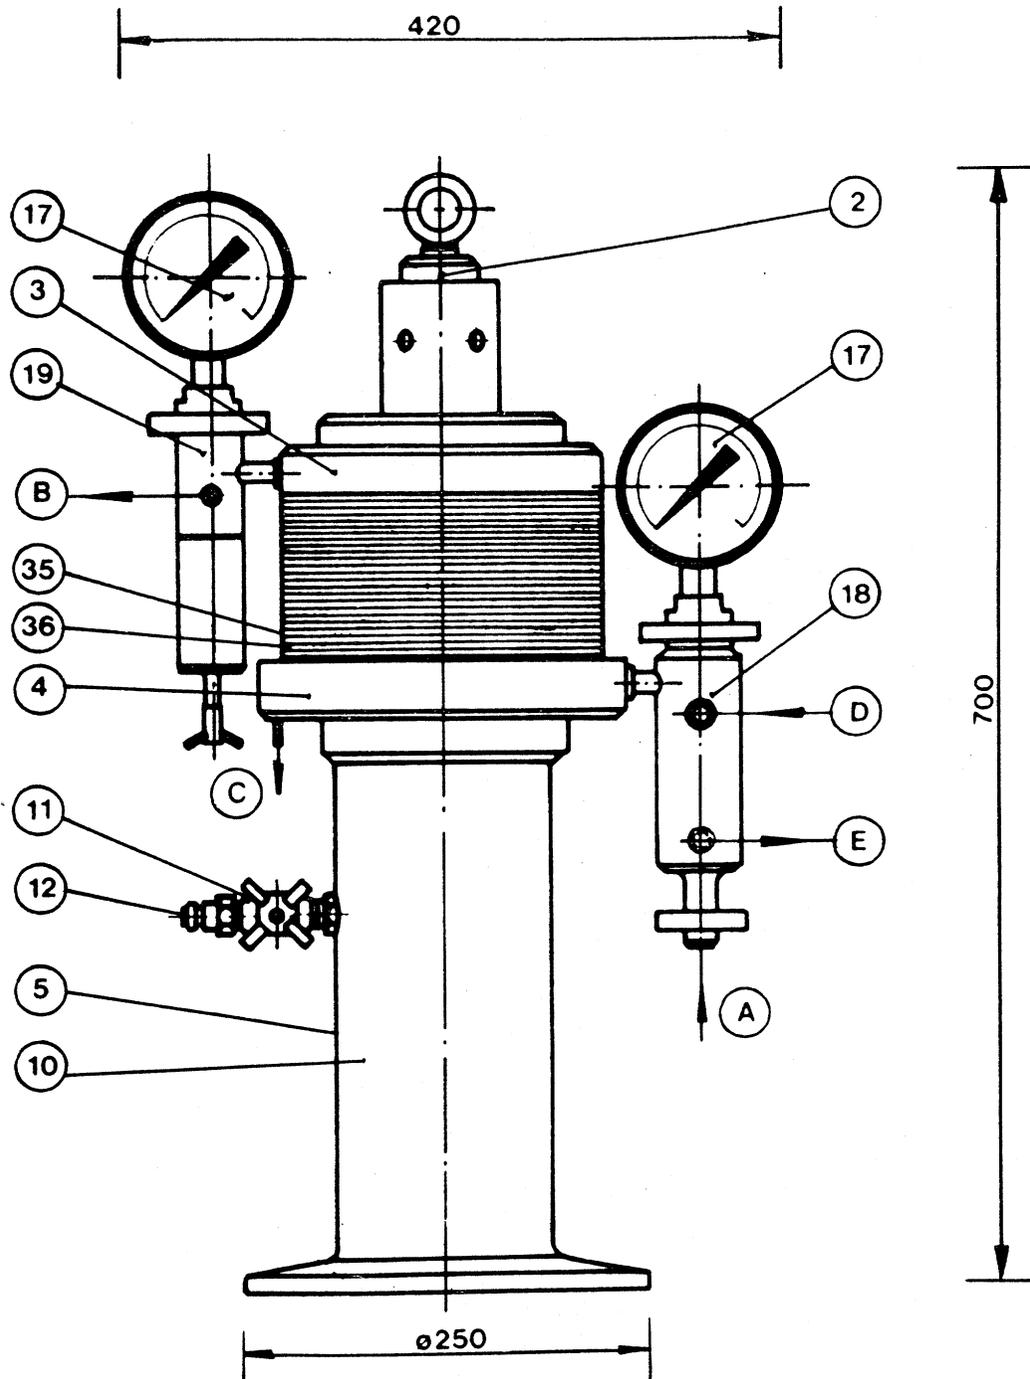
Reverse osmosis laboratory module. Legend: 2. center bolt, 3. top flange, 4. bottom flange, 5. base, 10. cylinder (built in), 11. valve, 12. coupling, 17. pressure gauge, 18. pressure gauge pocket with heat exchanger, 19. back pressure valve, 35. membrane support disc, 36. intermediate disc, A. inlet, B. outlet, C. drain pipe, D. cooling/heating medium inlet, and E. cooling/heating medium outlet.
